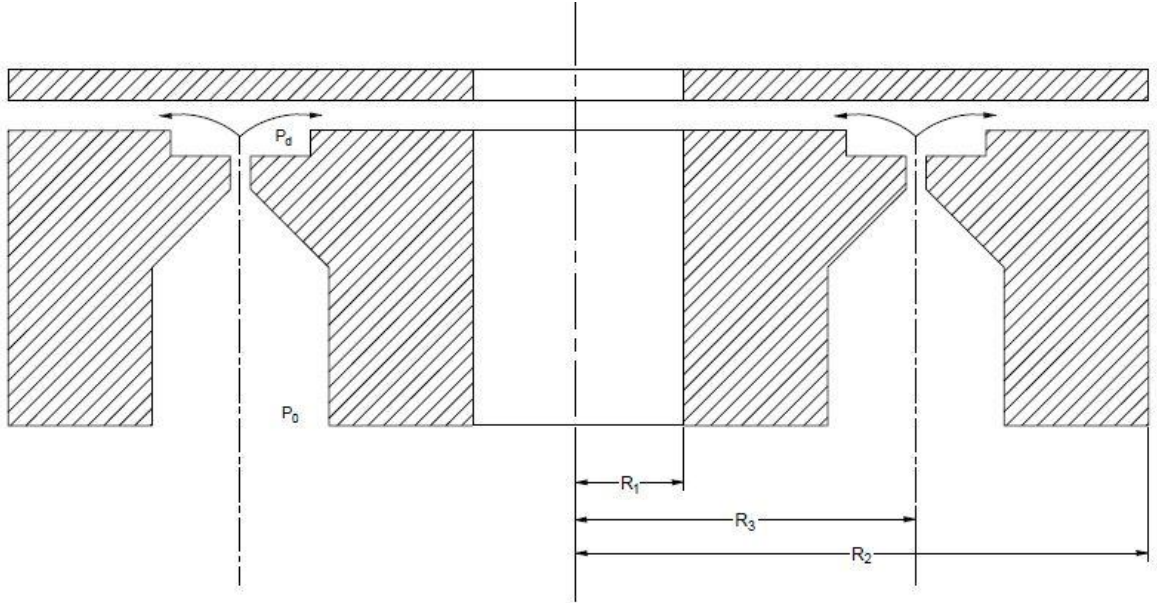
Sectional View of Annular thrust Bearing and shaft collar
